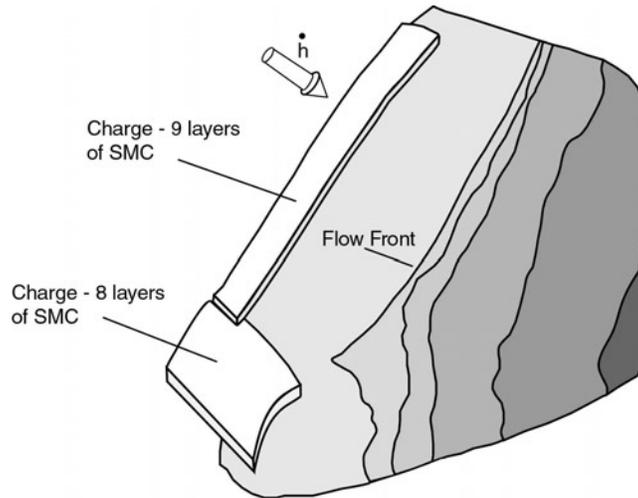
Mold filling pattern of a truck wind deflector generated by shimming the mold.
